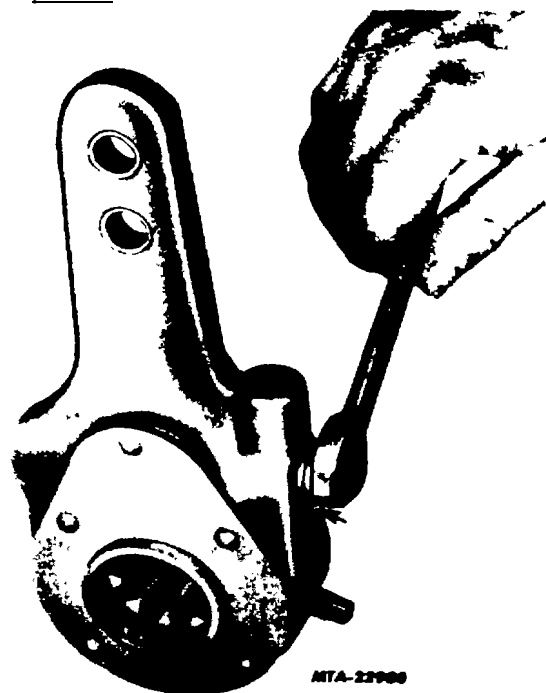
Slack Adjuster Locking Sleeve on Adjusting Nut
